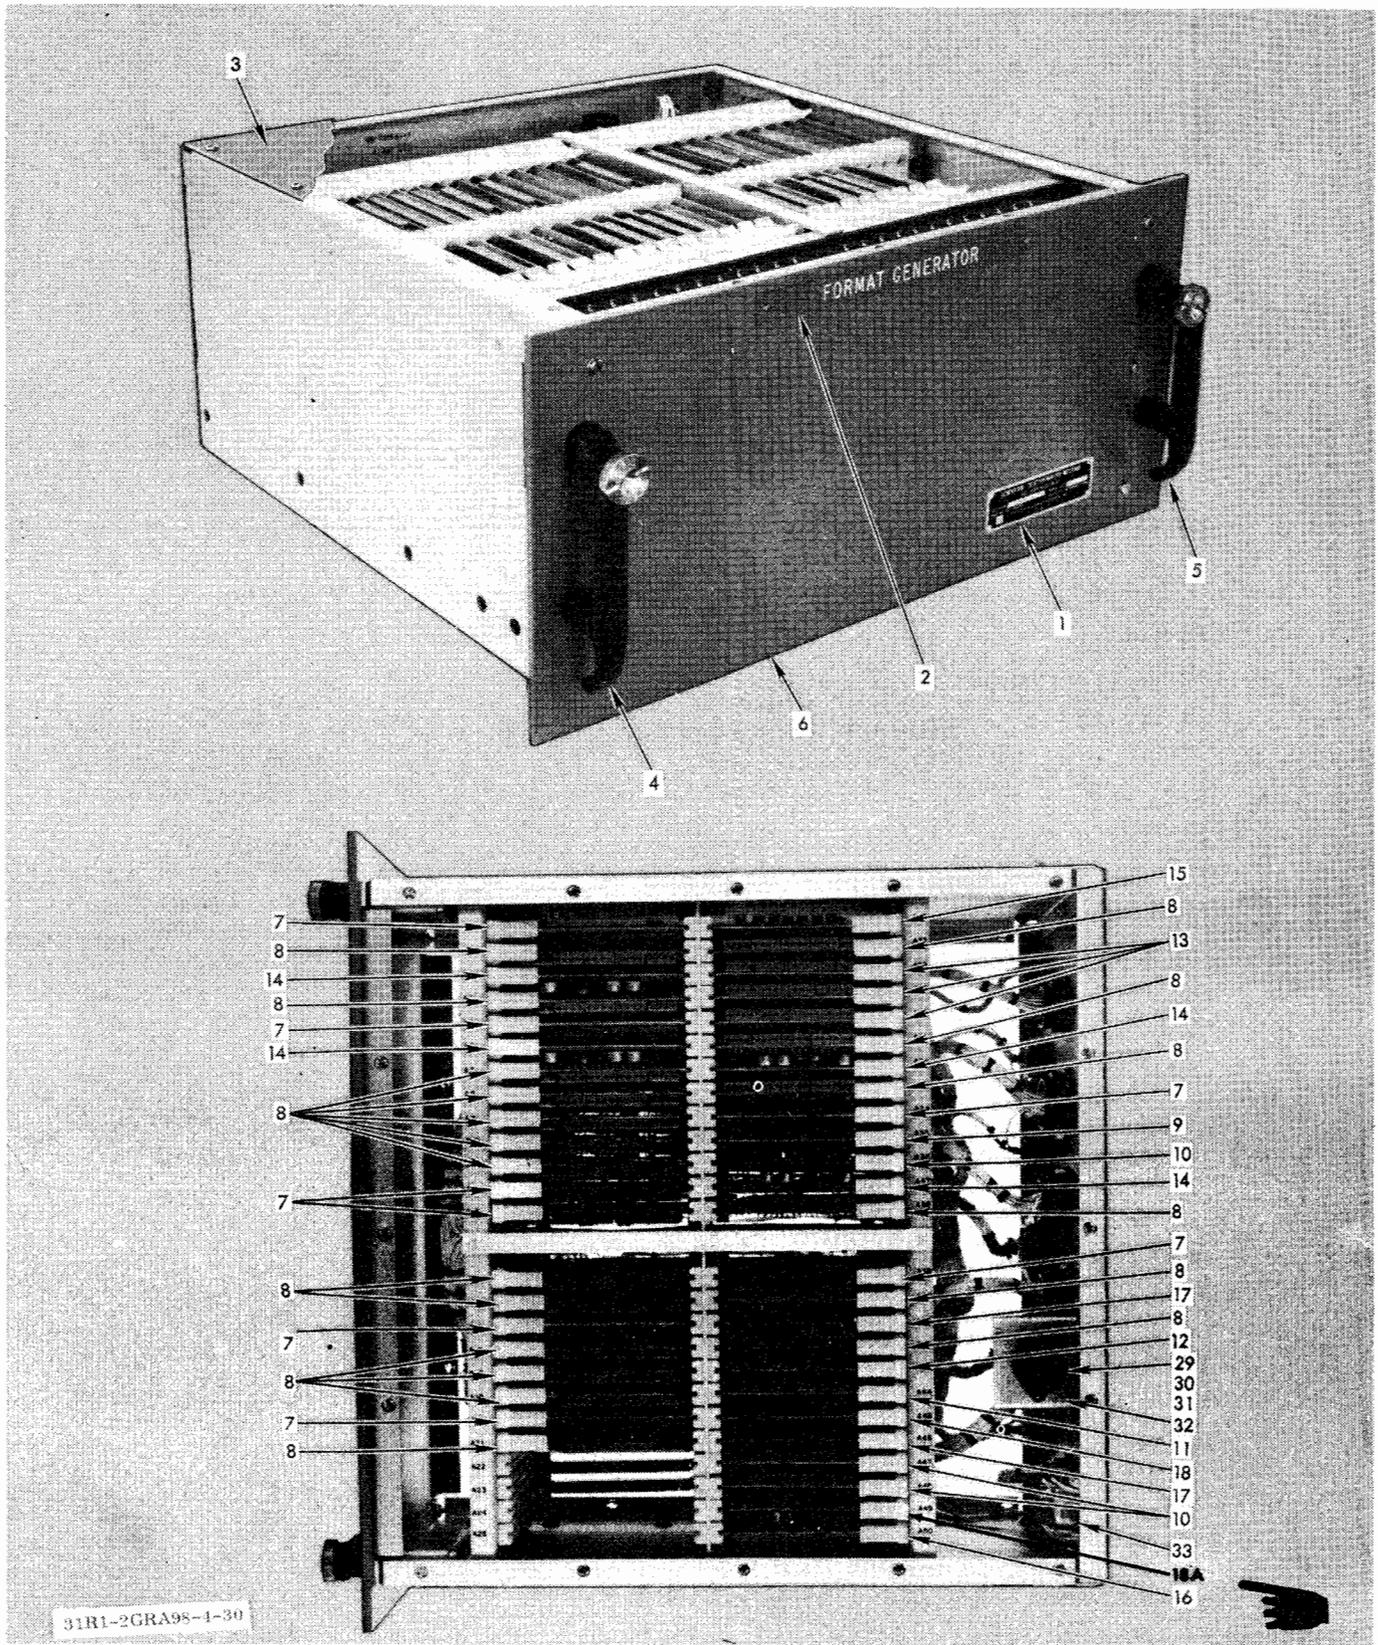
Teletypewriter Message Generator SG-624/FLR-9(V) (Sheet 1 of 2)
